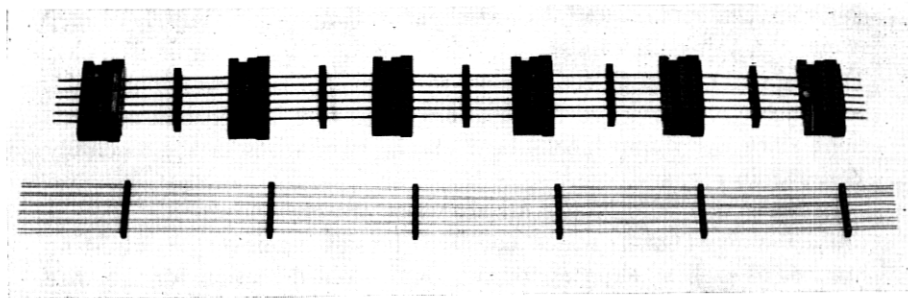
BF relay movable twin wire molded ladder (bottom) and fixed single wire molded ladder (top).
